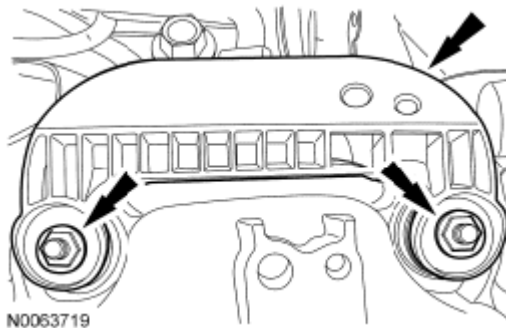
Locating Wiring Harness Retaining Bracket & Nuts
